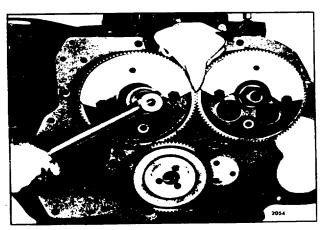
Removing or Installing Nut on Camshaft or Balance Shaft
